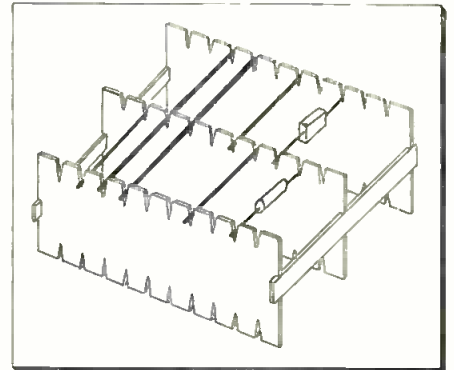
Bigger assemblies can be formed by ganging chassis units
